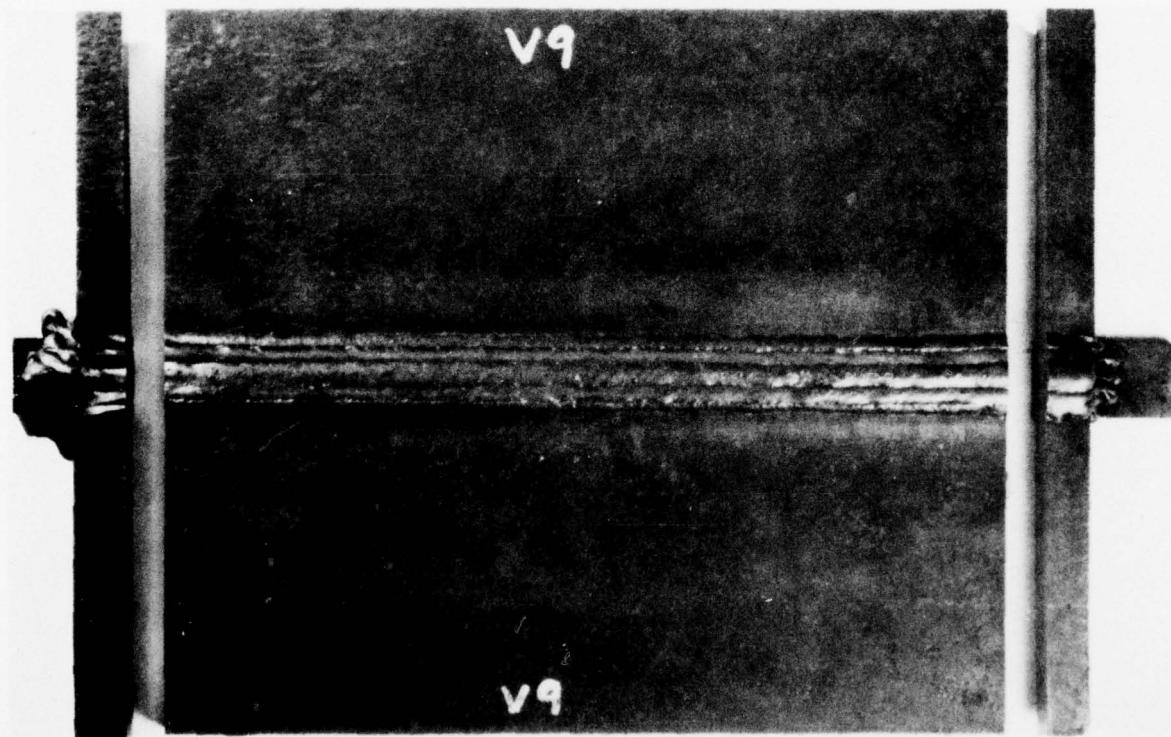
WELDMENT MECHANICAL PROPERTIES SPECIMEN V-9
